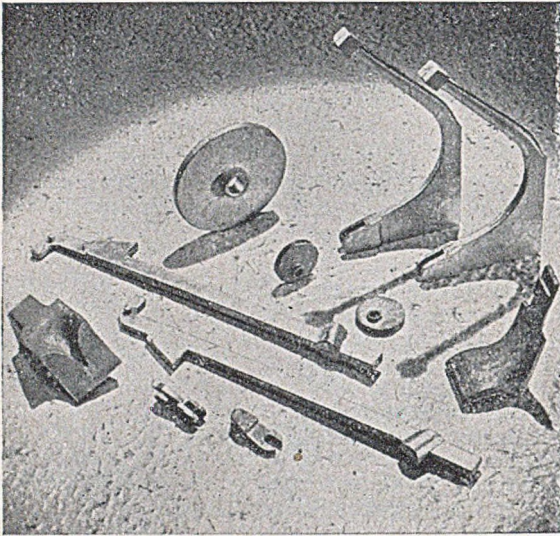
Group of Single Castings produced by Shell Moulding; in each case the Patternplate incorporated a Spray of Items.
